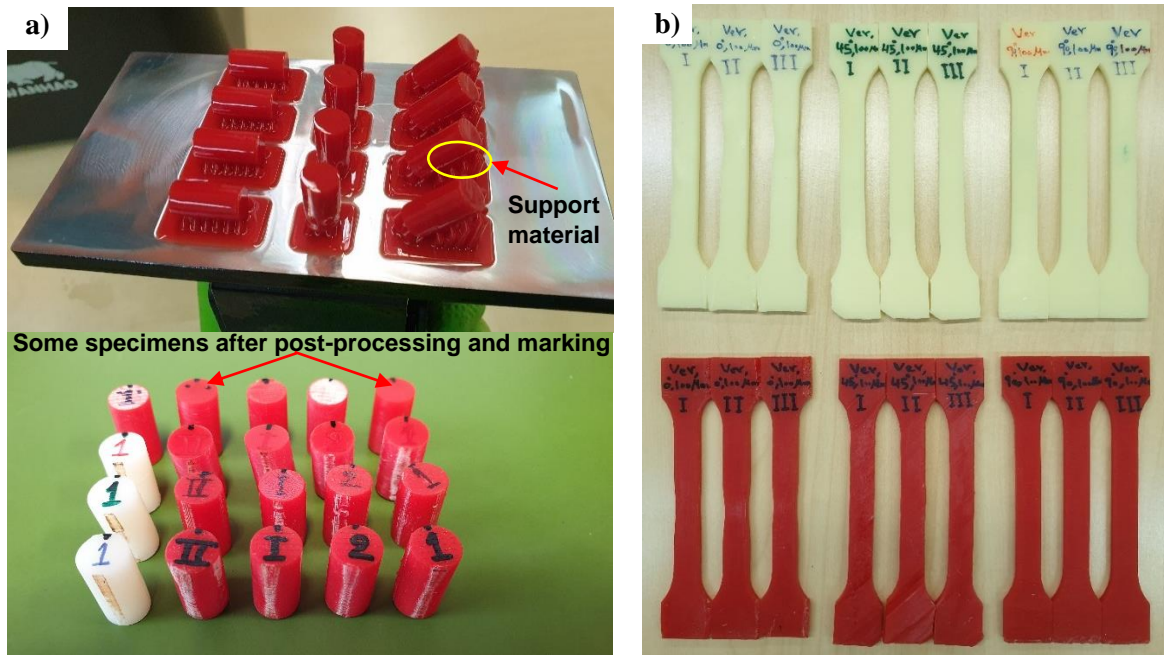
Actual samples of neat resin material DLP 3D-printed, a) tribology test pieces after manufacturing immediately and then after post-processing and marking, and b) tensile test specimens
